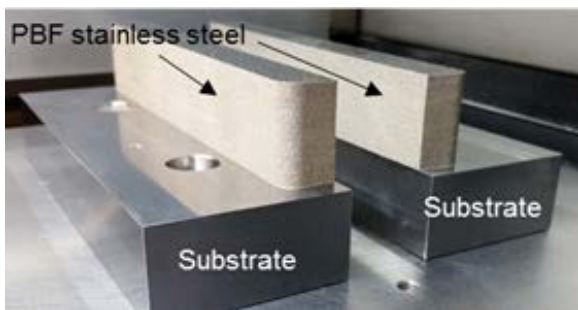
One pair of as-produced workpieces mounted on the PBF build platform. Each workpiece has a PBF stainless steel rib (top section) and a wrought substrate (bottom section).
